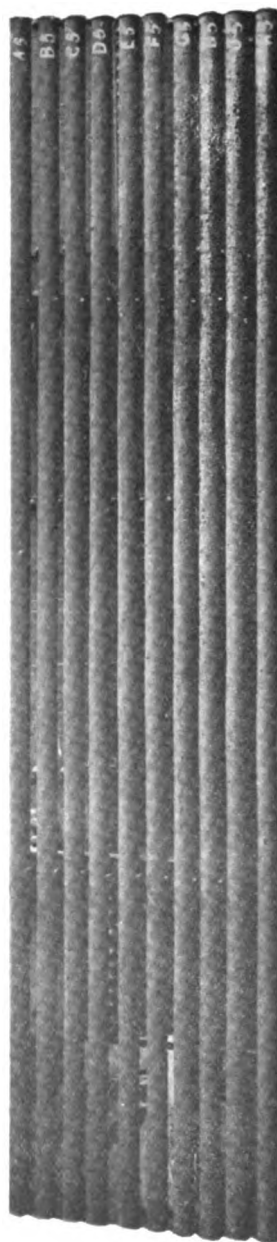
APPEARANCE OF TUBES, BOILER No. 4084 AFTER DISMANTLING. VERTICAL ROW, FIFTH FROM RIGHT SIDE OF BOILER
